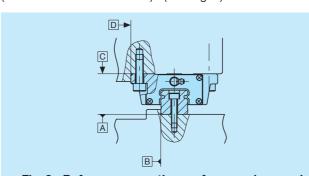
Reference mounting surfaces and general mounting structure of Linear Way
